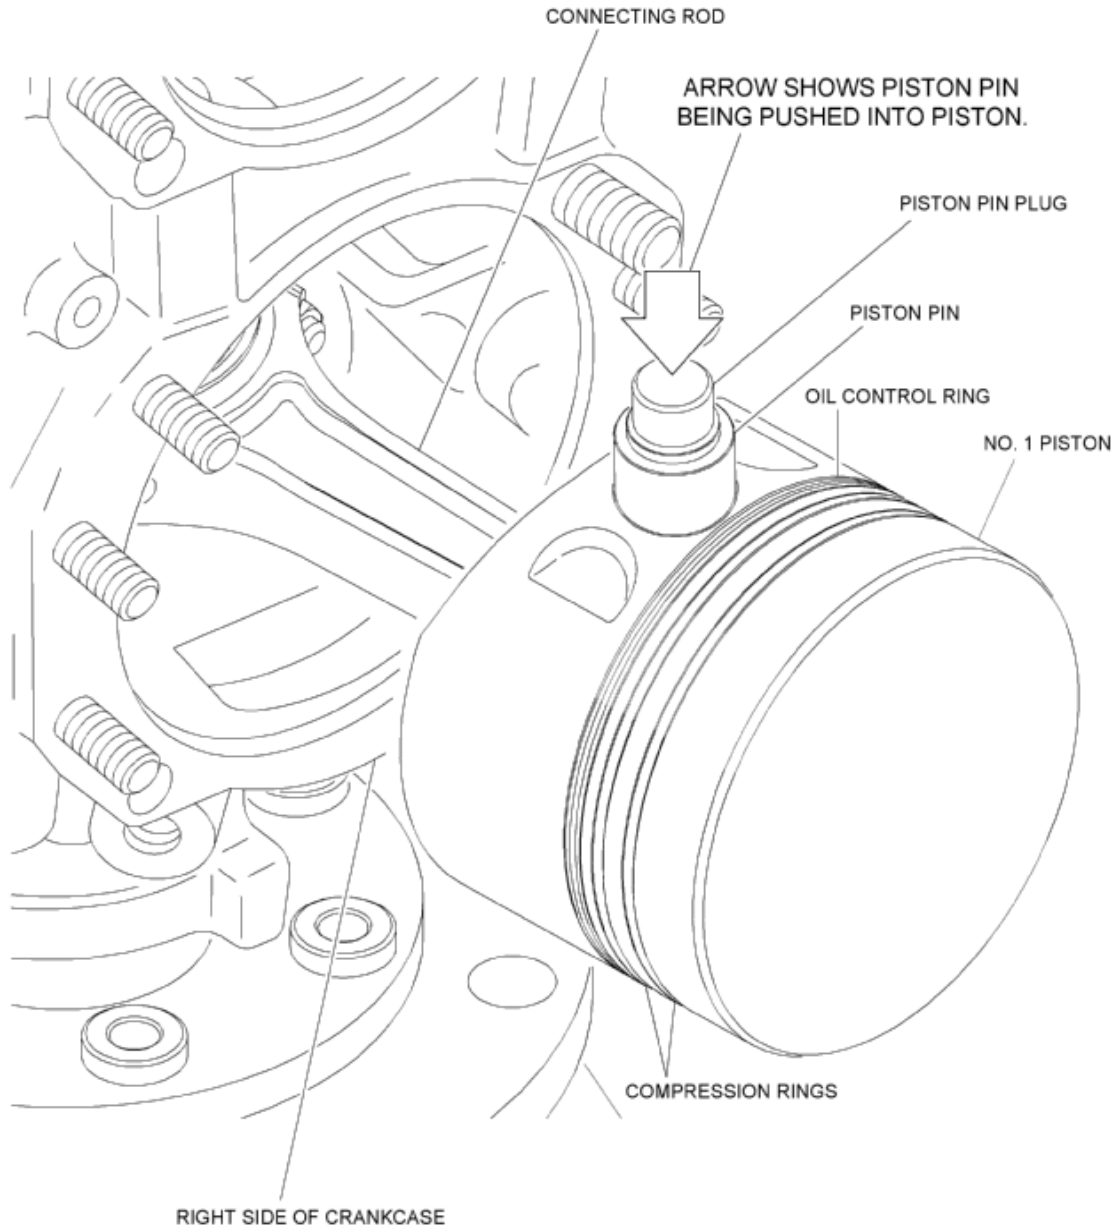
• Piston Assembly to Connecting Rod
